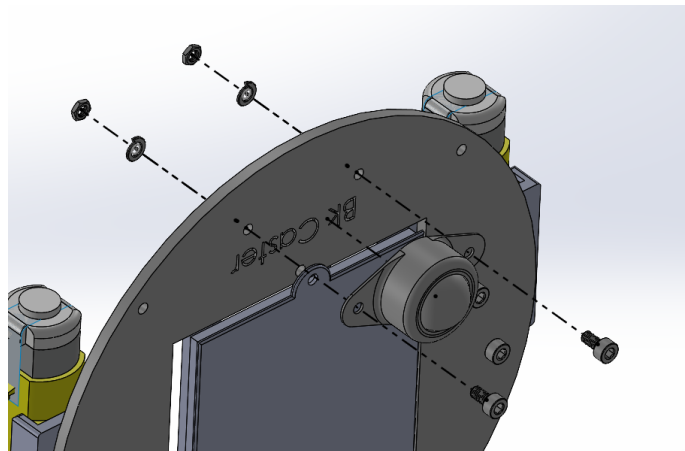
Attach the caster wheel to the bottom robot chassis using 2 screws, 2 nuts, and 2 lock washers
